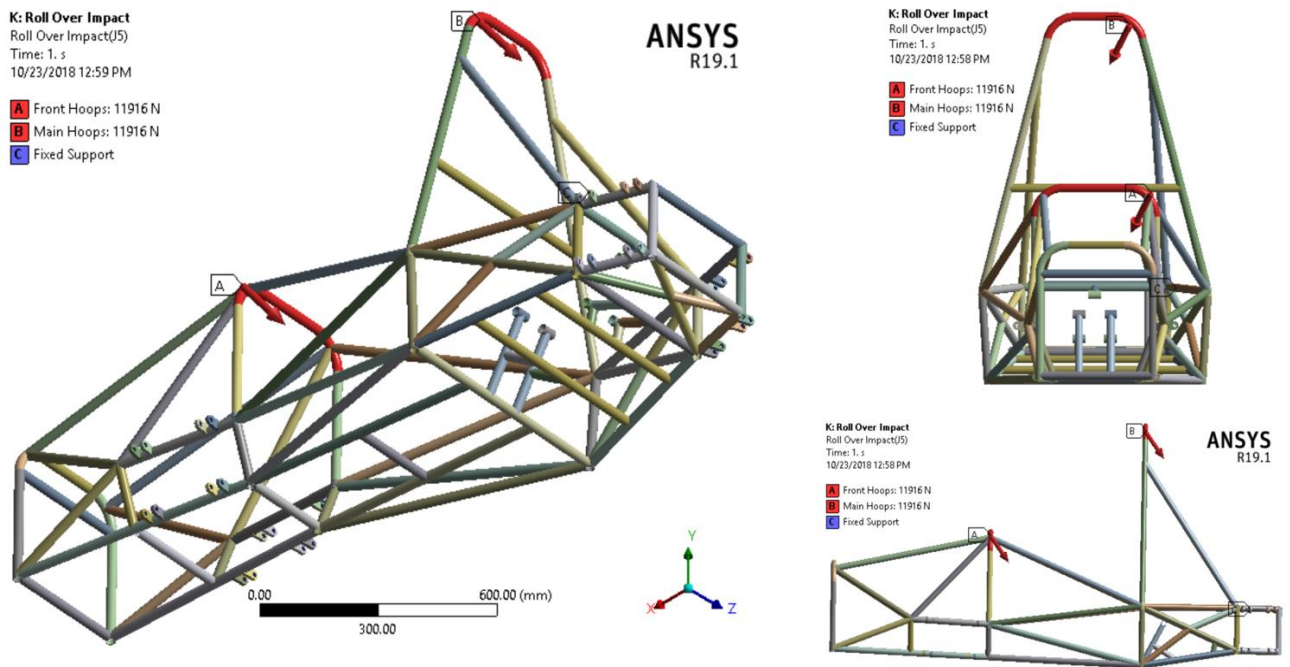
Rollover impact load applied on the Formula SAE M2 Chassis (front, side, and isometric view)
